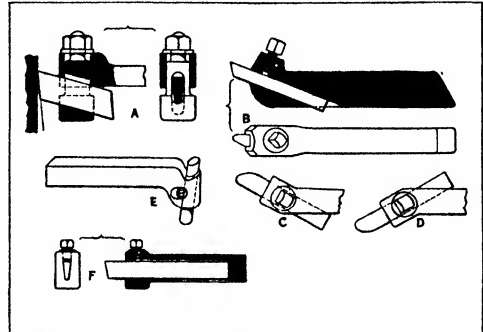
TOOL-HOLDERS. (A) SWIVELLING HOLDER. (B) SQUARE STEEL HOLDER. (C, D) RIGHT- AND LEFT-HAND FORMS OF SAME. (E) ROUND STEEL HOLDER. (F) NARROW PARTING-OFF TOOL HOLDER
